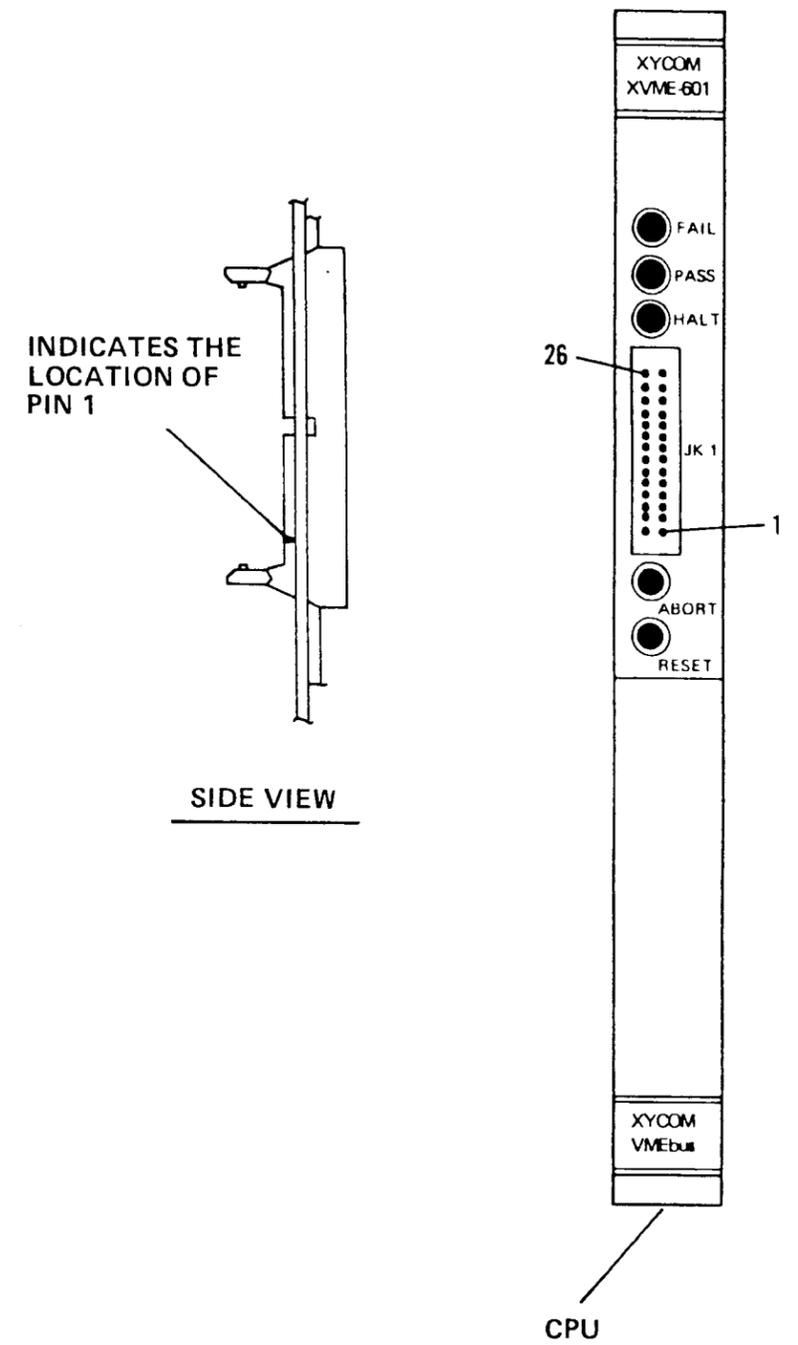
DCP VMEbus Chassis and Connector Pin Assignments (Sheet 2)
